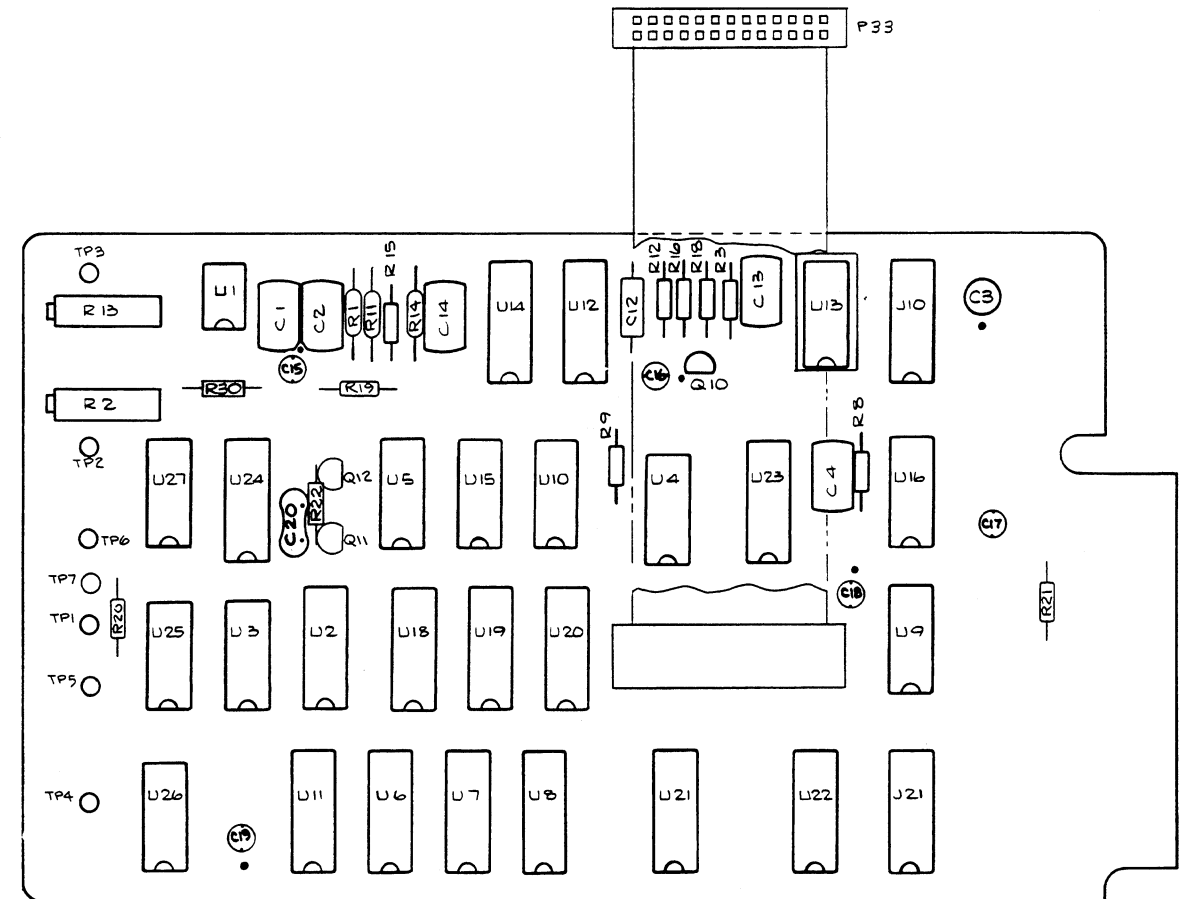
A9 Power Supply Regulator PCB (cont)
